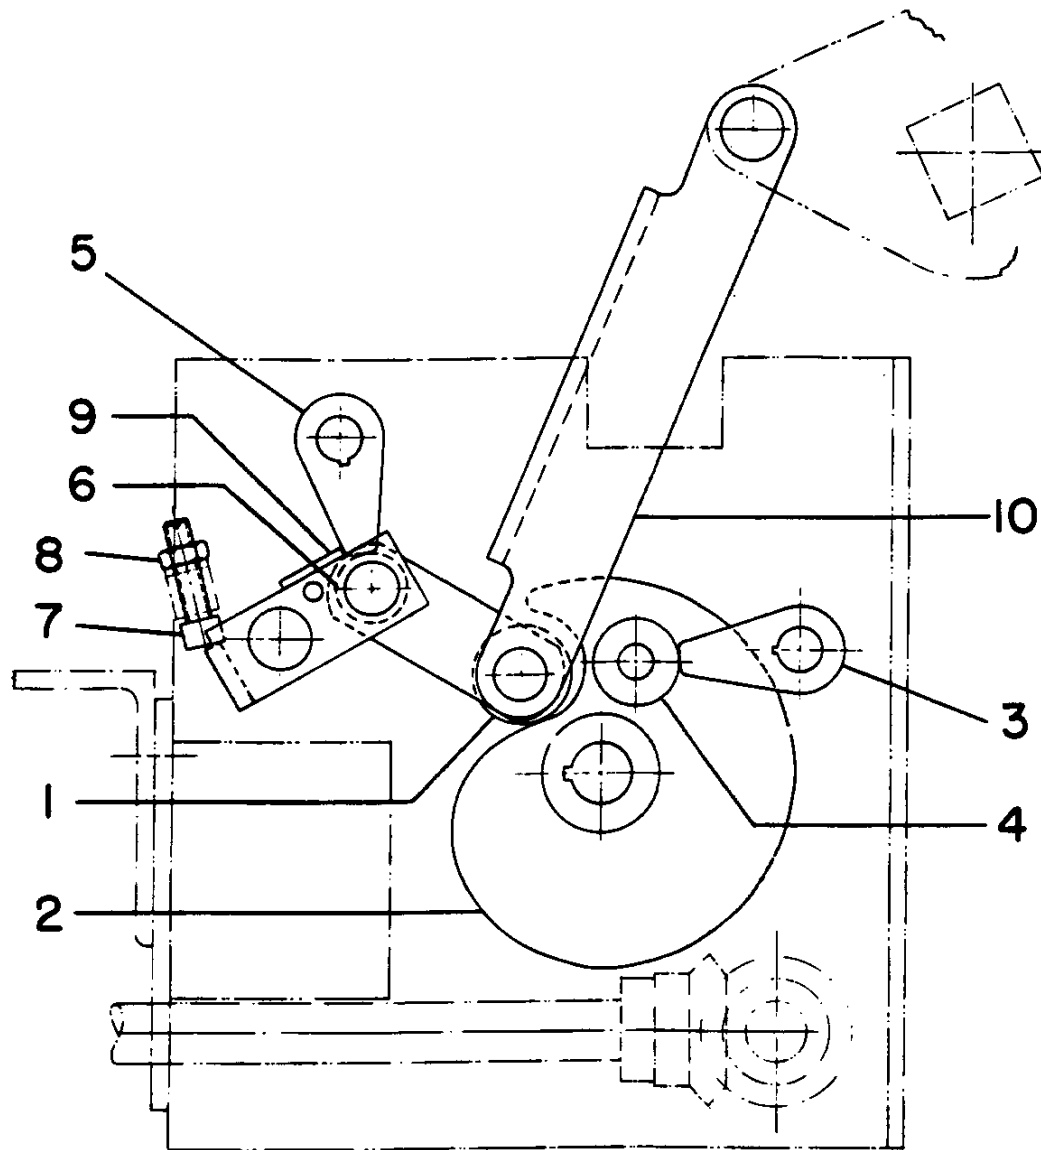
(8918290-F) Mechanism-Front Top (Breaker Open and Closing Springs Discharged)
